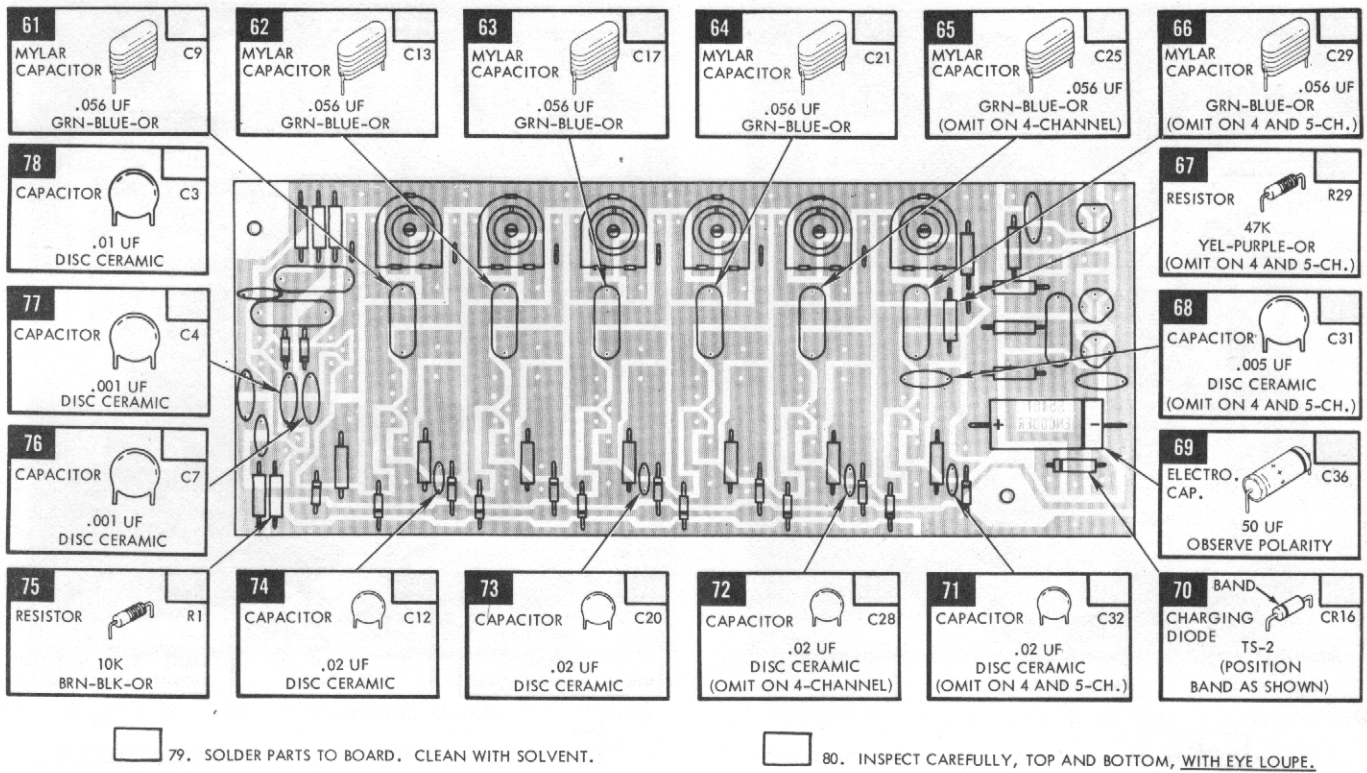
Logic Board Assembly (Sheet 4 of 6)
